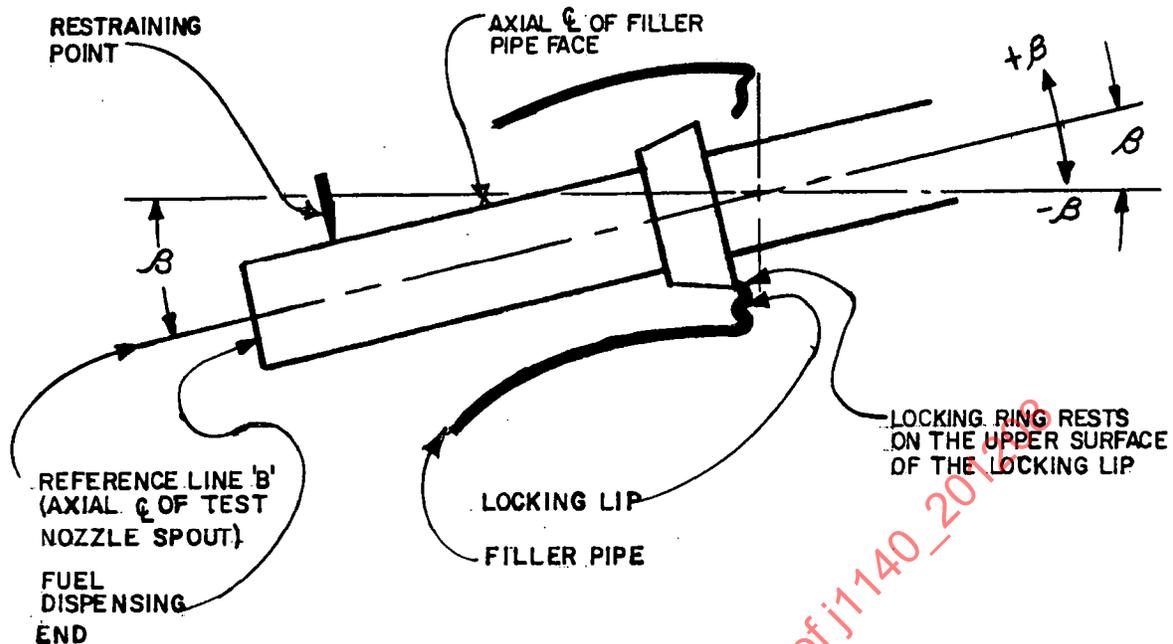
B—SAE J829, TYPE FILLER PIPE (INSERTION POSITION)
